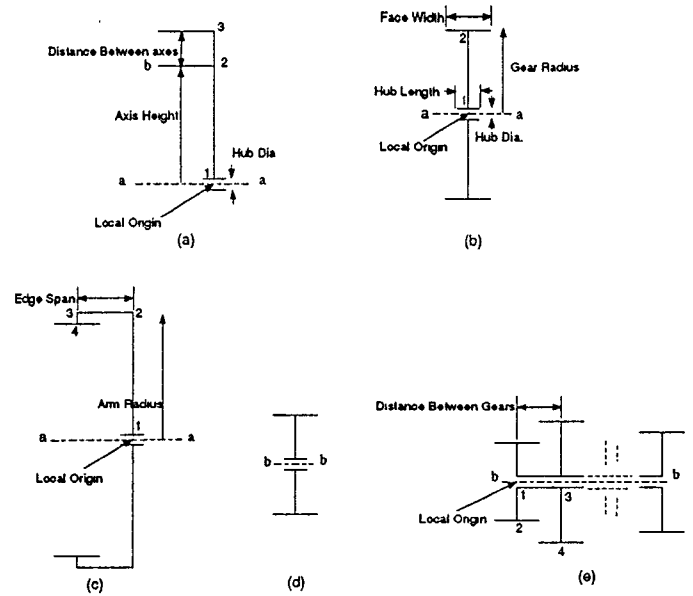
Primitives: (a) carrier, (b) sun gear, (c) ring gear, (d) single-planet gear, (e) multiple planet gear.
